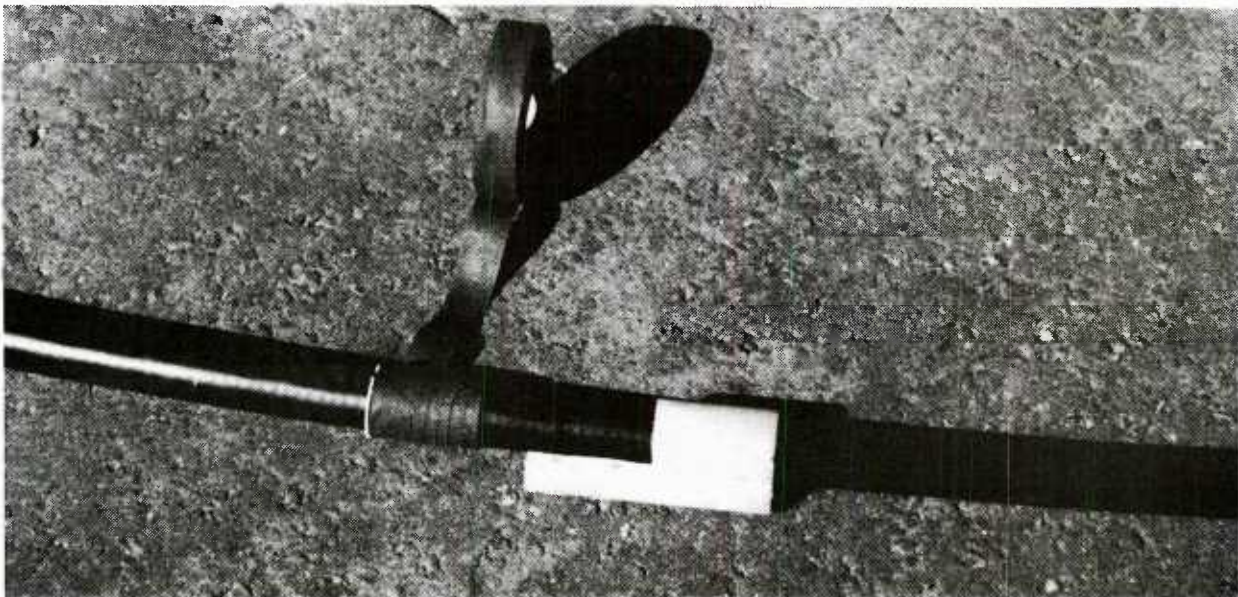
The bearing is butted against the layers of friction tape, then the tape is spiral wrapped with hand tension over the bearing to the bearing flange.
